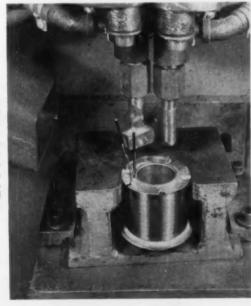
Two split sleeves are centered over this welder's horn, pressed together and then projection welded at four points to the channel-shaped bracket.
